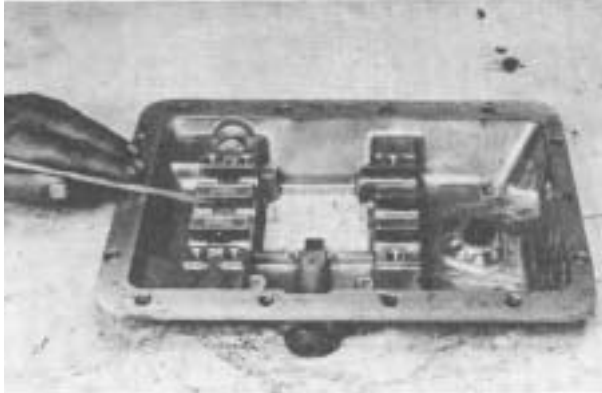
Position crossover interlock balls in cover cross bores. Two balls in cover cross bore between 1st & reverse rail groove, and 2nd & 3rd rail groove and two balls in cover cross bore between 2nd & 3rd rail groove, and 4th & 5th rail groove. (See cross-section illustration Figure 13-A).
